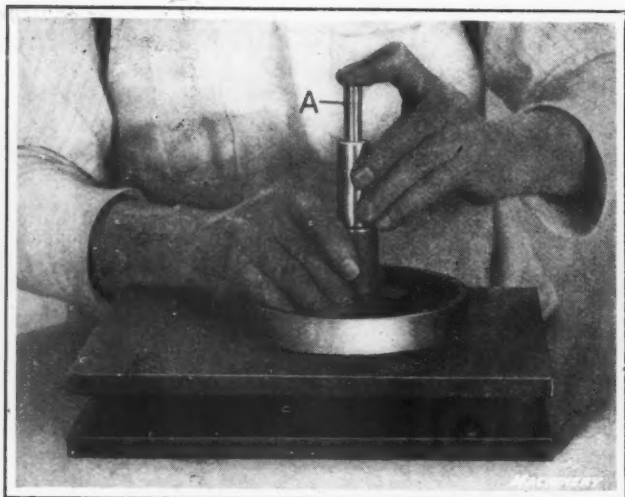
Surface Lap and Fixture for facing End of Gage A Perpendicular to its Axis
